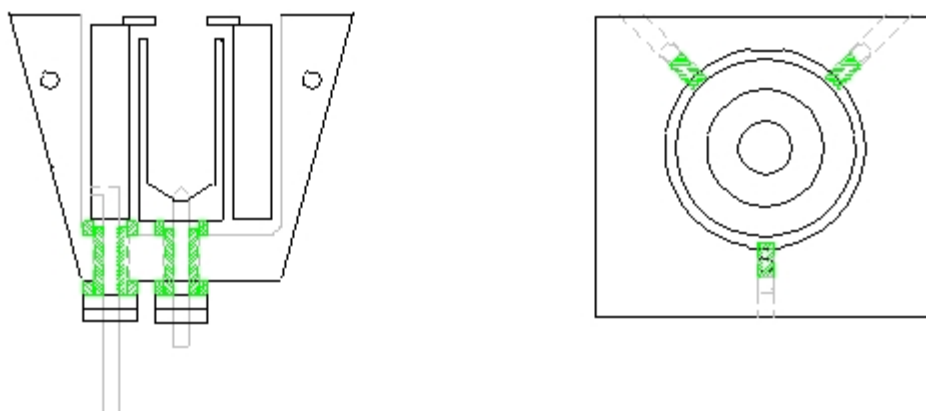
Assembly drawing of Faraday cup and tertiary aperture inside a sample module.
